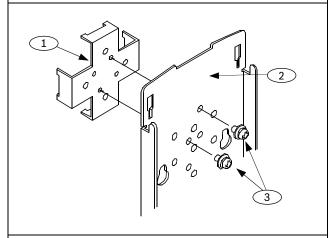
Use of Mounting Bracket Flange based upon Pole Diameter
